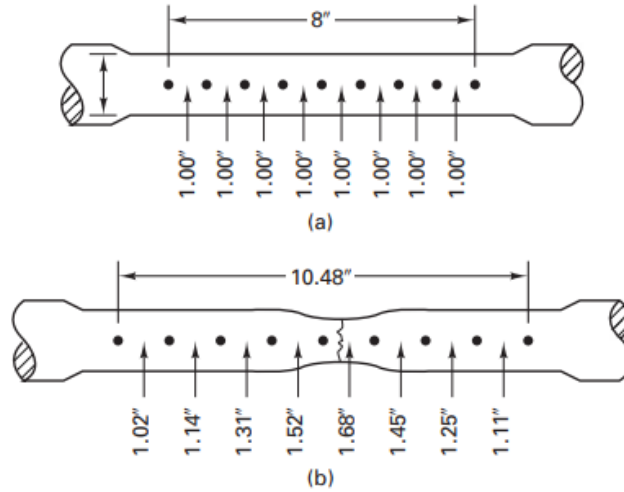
Final elongation in various segments of a tensile test specimen: (a) original geometry; (b) shape after fracture.
